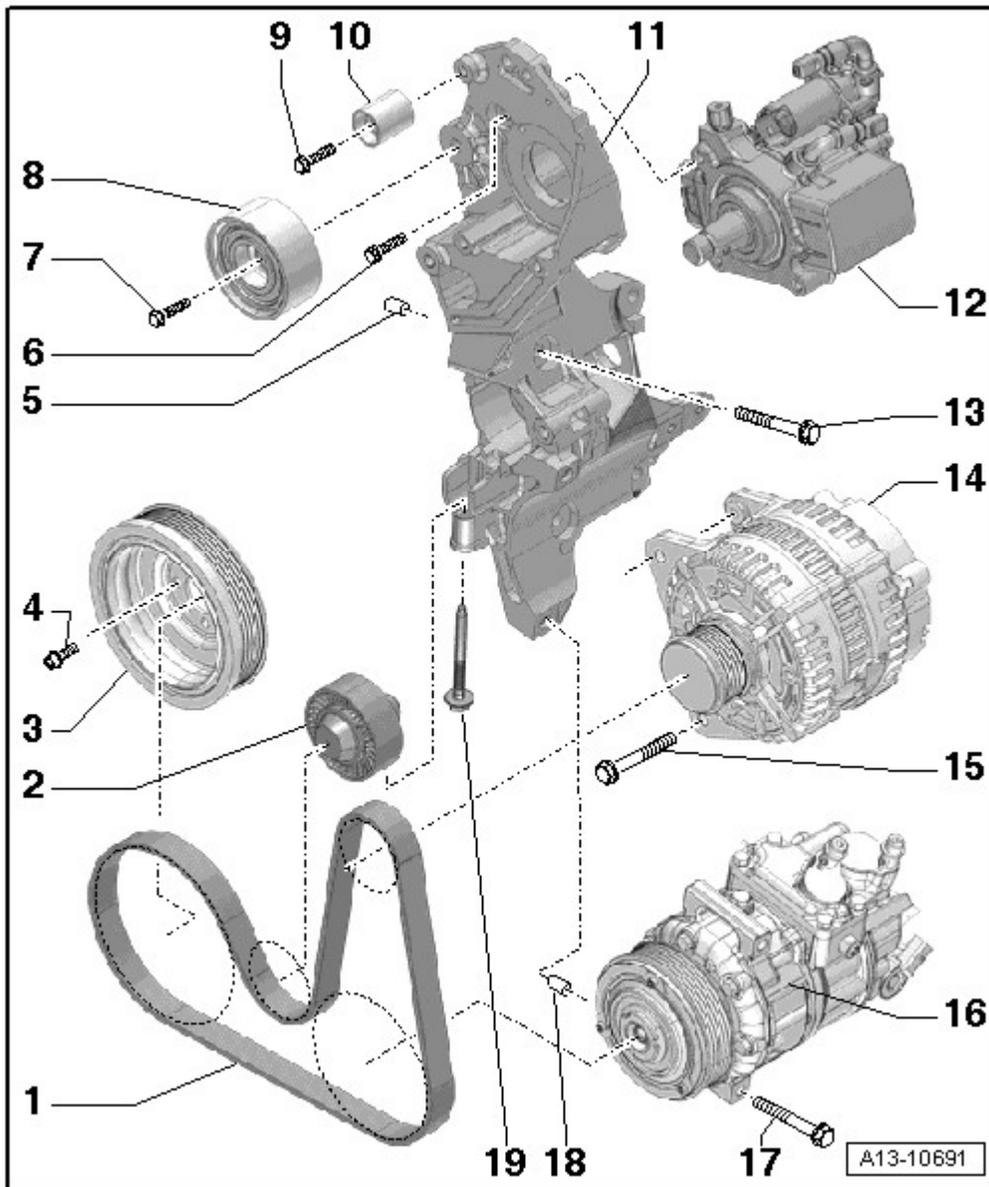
Identifying Ribbed Belt With Tensioning Roller, Overview
